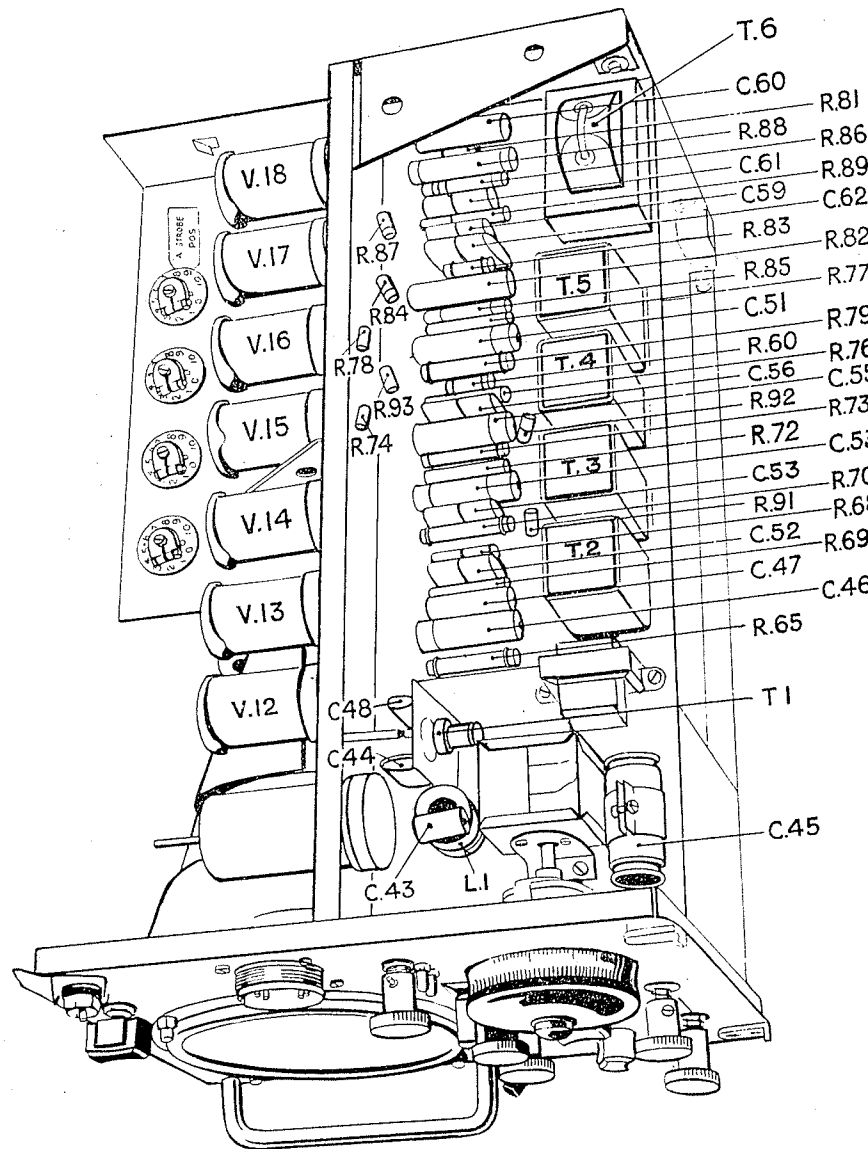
Indicator unit type 62A, L.H. side of chassis.
